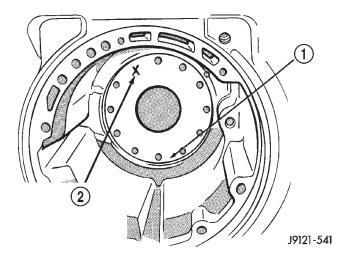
Location Of Blank Area In Clutch Cam Bolt Circle
